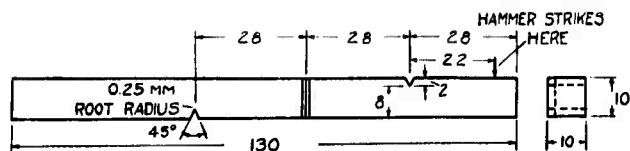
British Standard Izod Specimen (All-Weld-Metal). Dimensions in Millimeters
